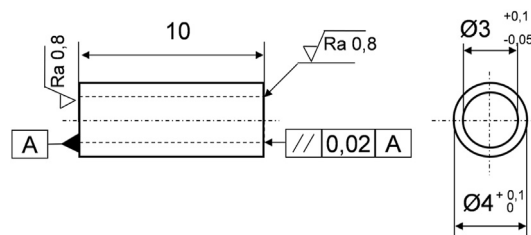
Geometry of the dilatometer samples (dimensions in mm).
